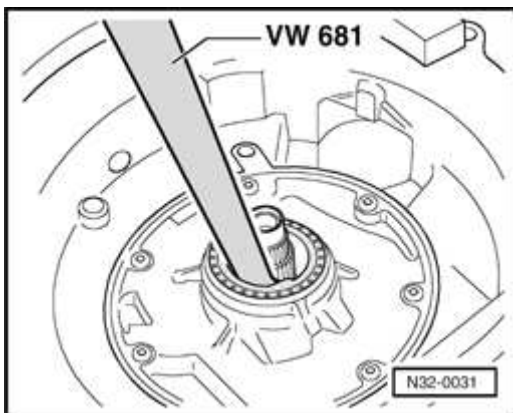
Removing Torque Converter Oil Seal Using Special Tool VW 681
